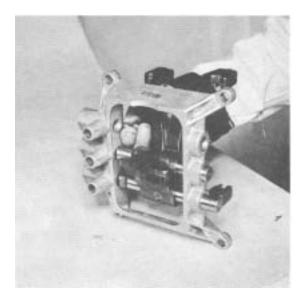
Install two interlock balls between the 2nd & 3rd, and 1st & Reverse shift rods.
